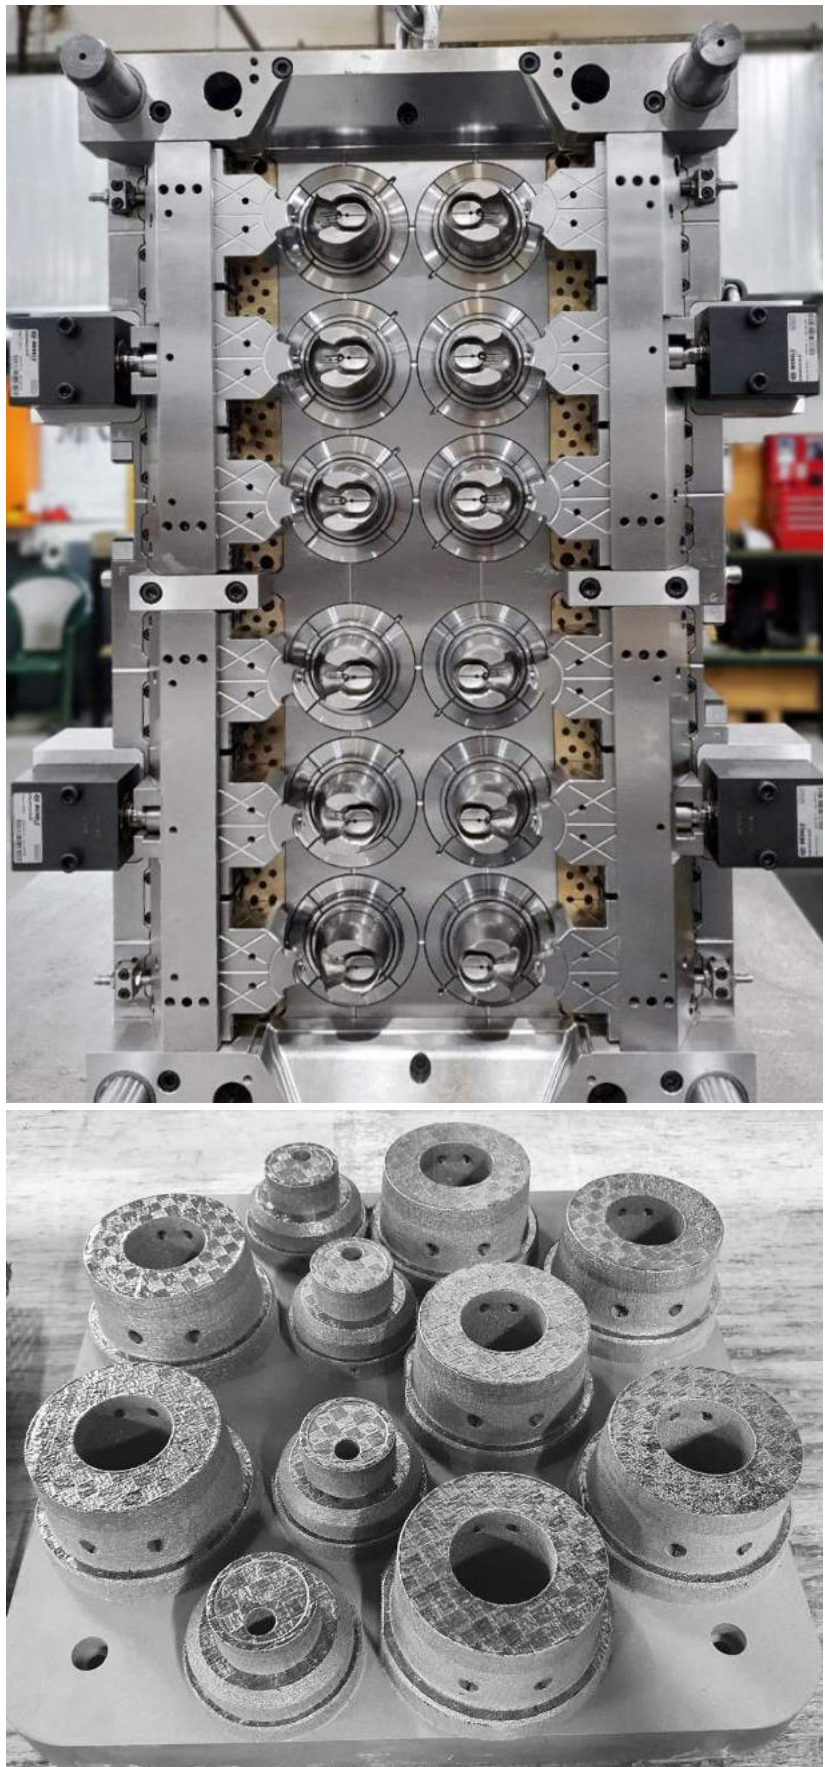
Assembled multi-cavity injection moulding tool (top) and metal additively manufactured mould inserts (bottom) (Courtesy Berry Astrapak)
